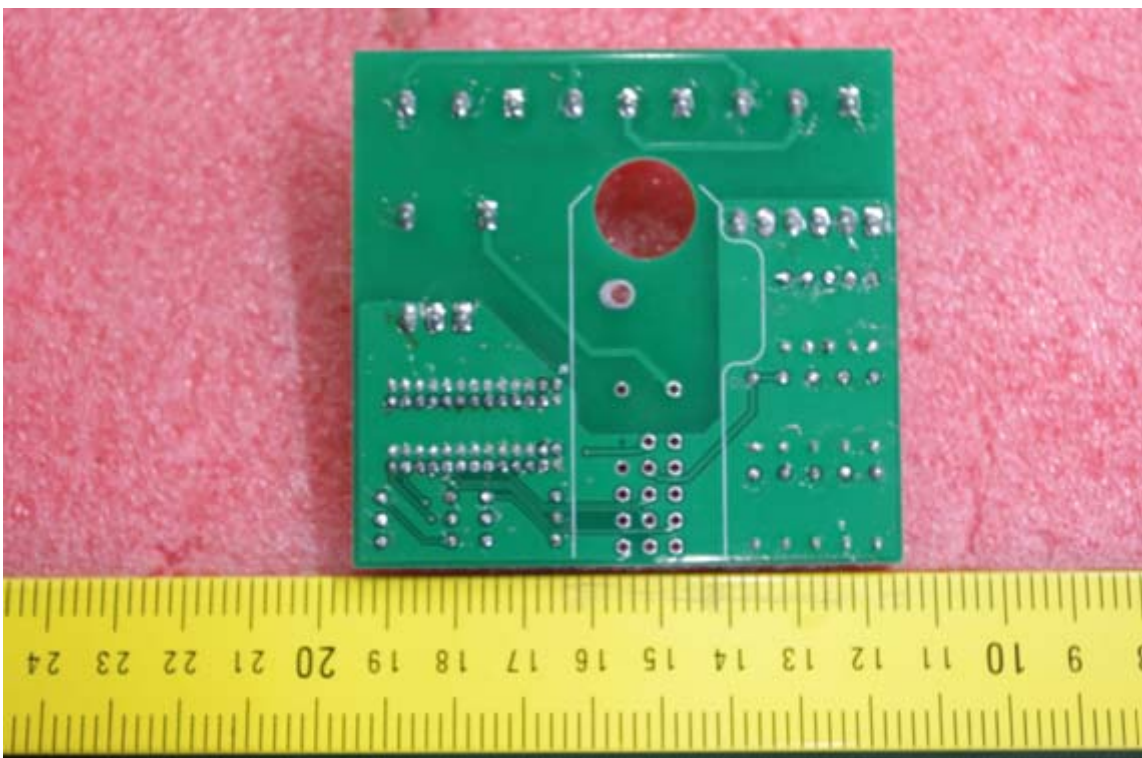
Board SNT\_PCB\_3320\_FJ, trace side view
